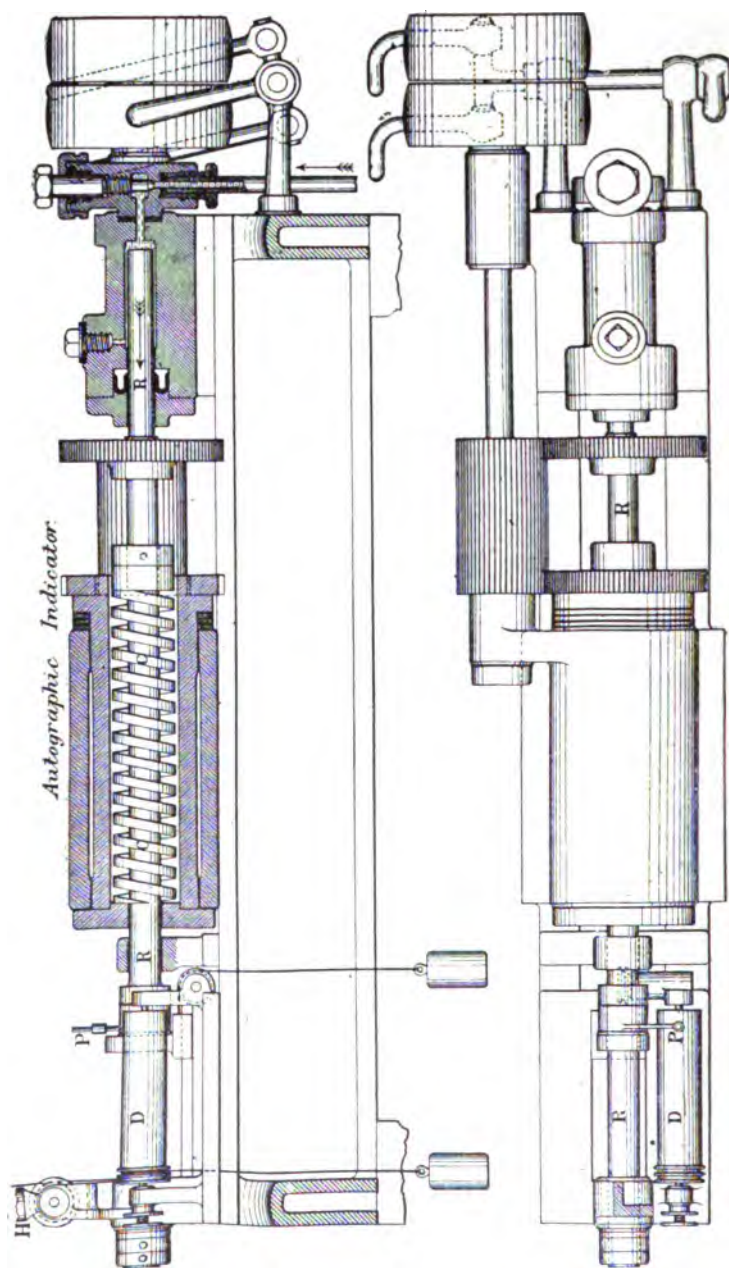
LONGITUDINAL SECTION AND PLAN OF WICKSTER'S AUTOGRAPHIC RECORDER.
